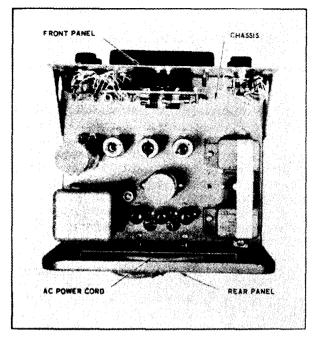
Vibration Meter Type 1-117-0105, Top View, Cover Removed
